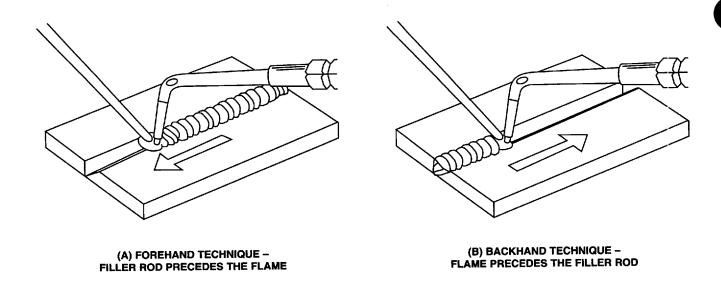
Oxyfuel Gas Welding (OFW)
